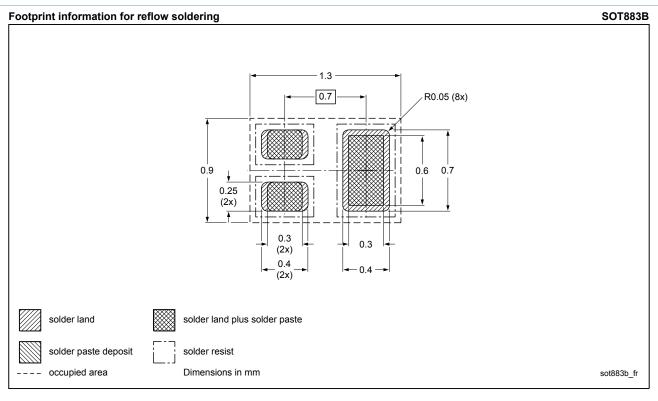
Reflow soldering footprint for SOT883B (DFN1006B-3)
